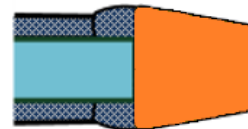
Boxing weld type of fatigue specimen
